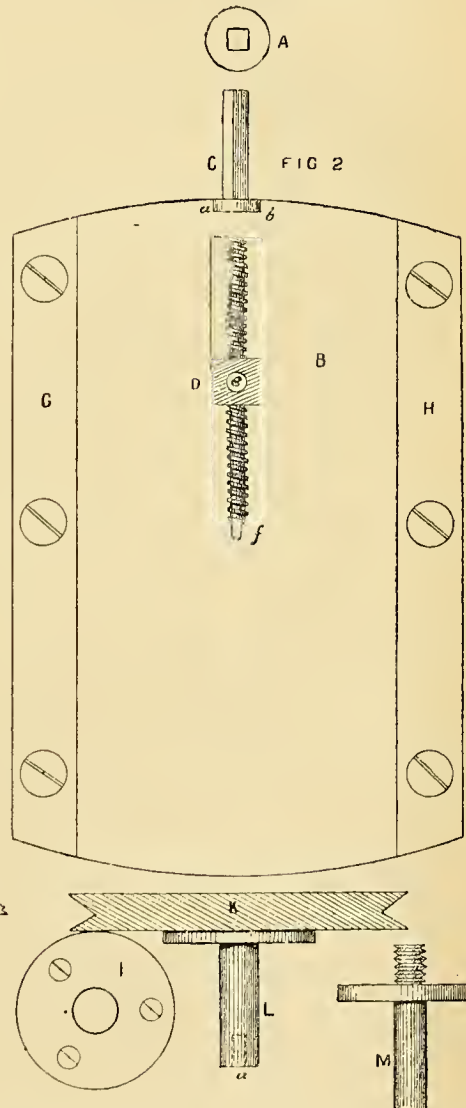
ECCENTRIC CHUCK.—FRONT VIEW, WITH SLIDE DOWN TO SHOW SCREW THAT SHIFTS PLATE.
